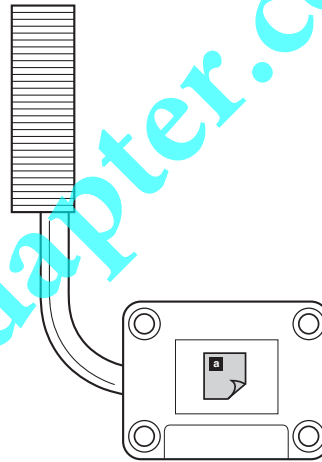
Removal steps of fan assembly and heat sink assembly (continued)
